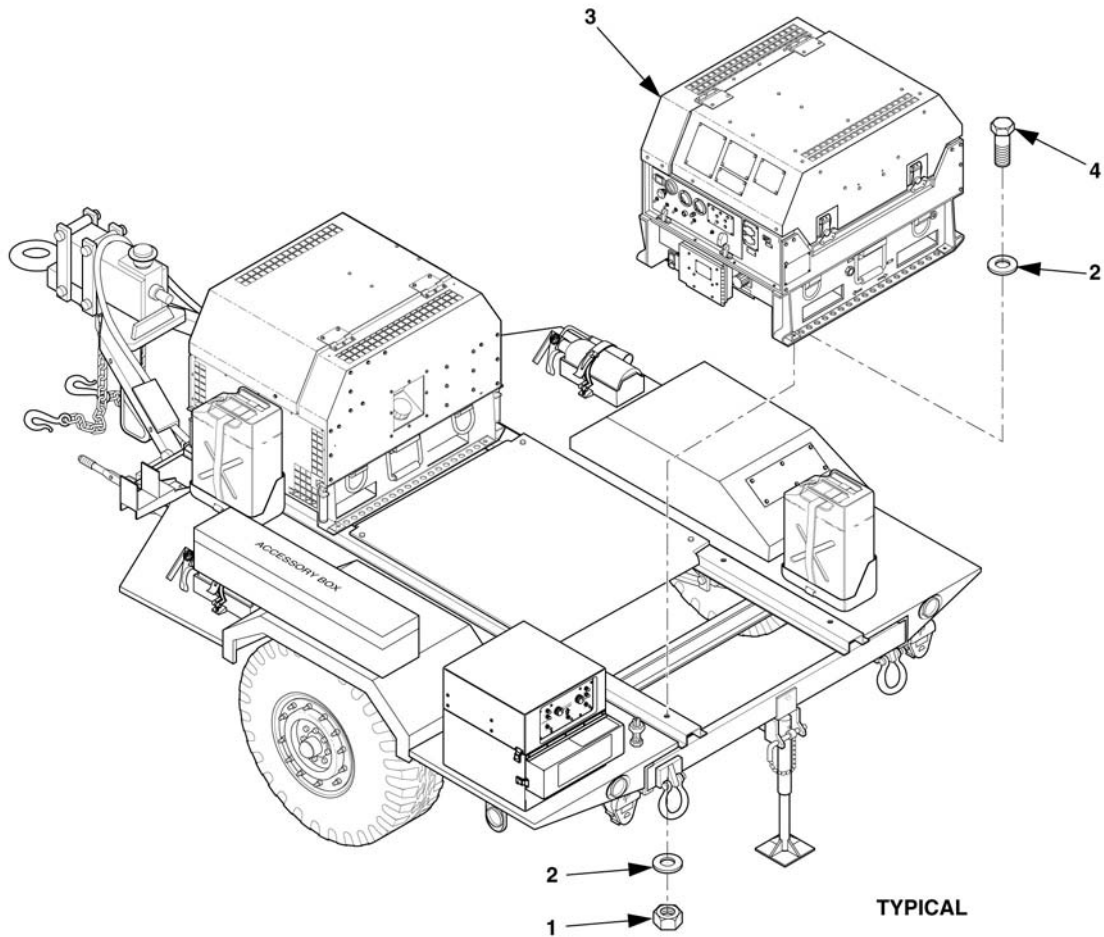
Removing Generator, 3kW Mounting Hardware.
